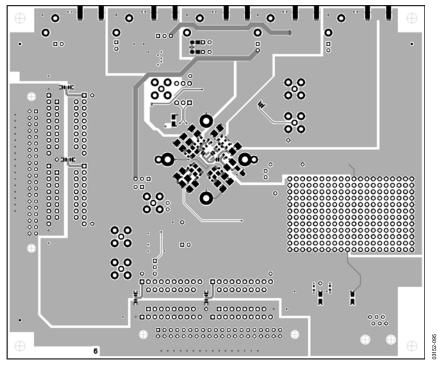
PCB Assembly, Layer 6 Metal, Rev F Evaluation Board
